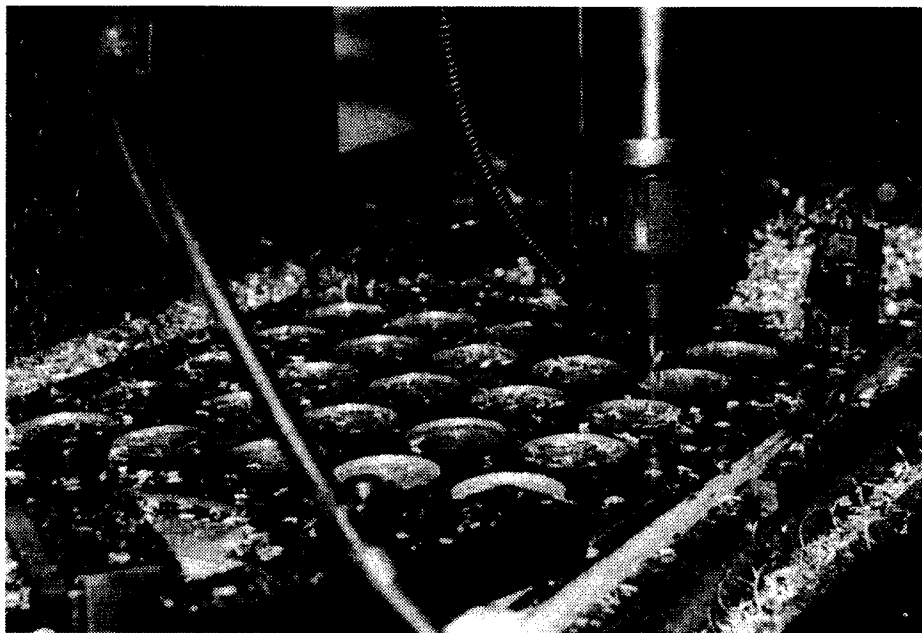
Photograph of CNC mill cutting 1.6 in. holes in a square pattern.
